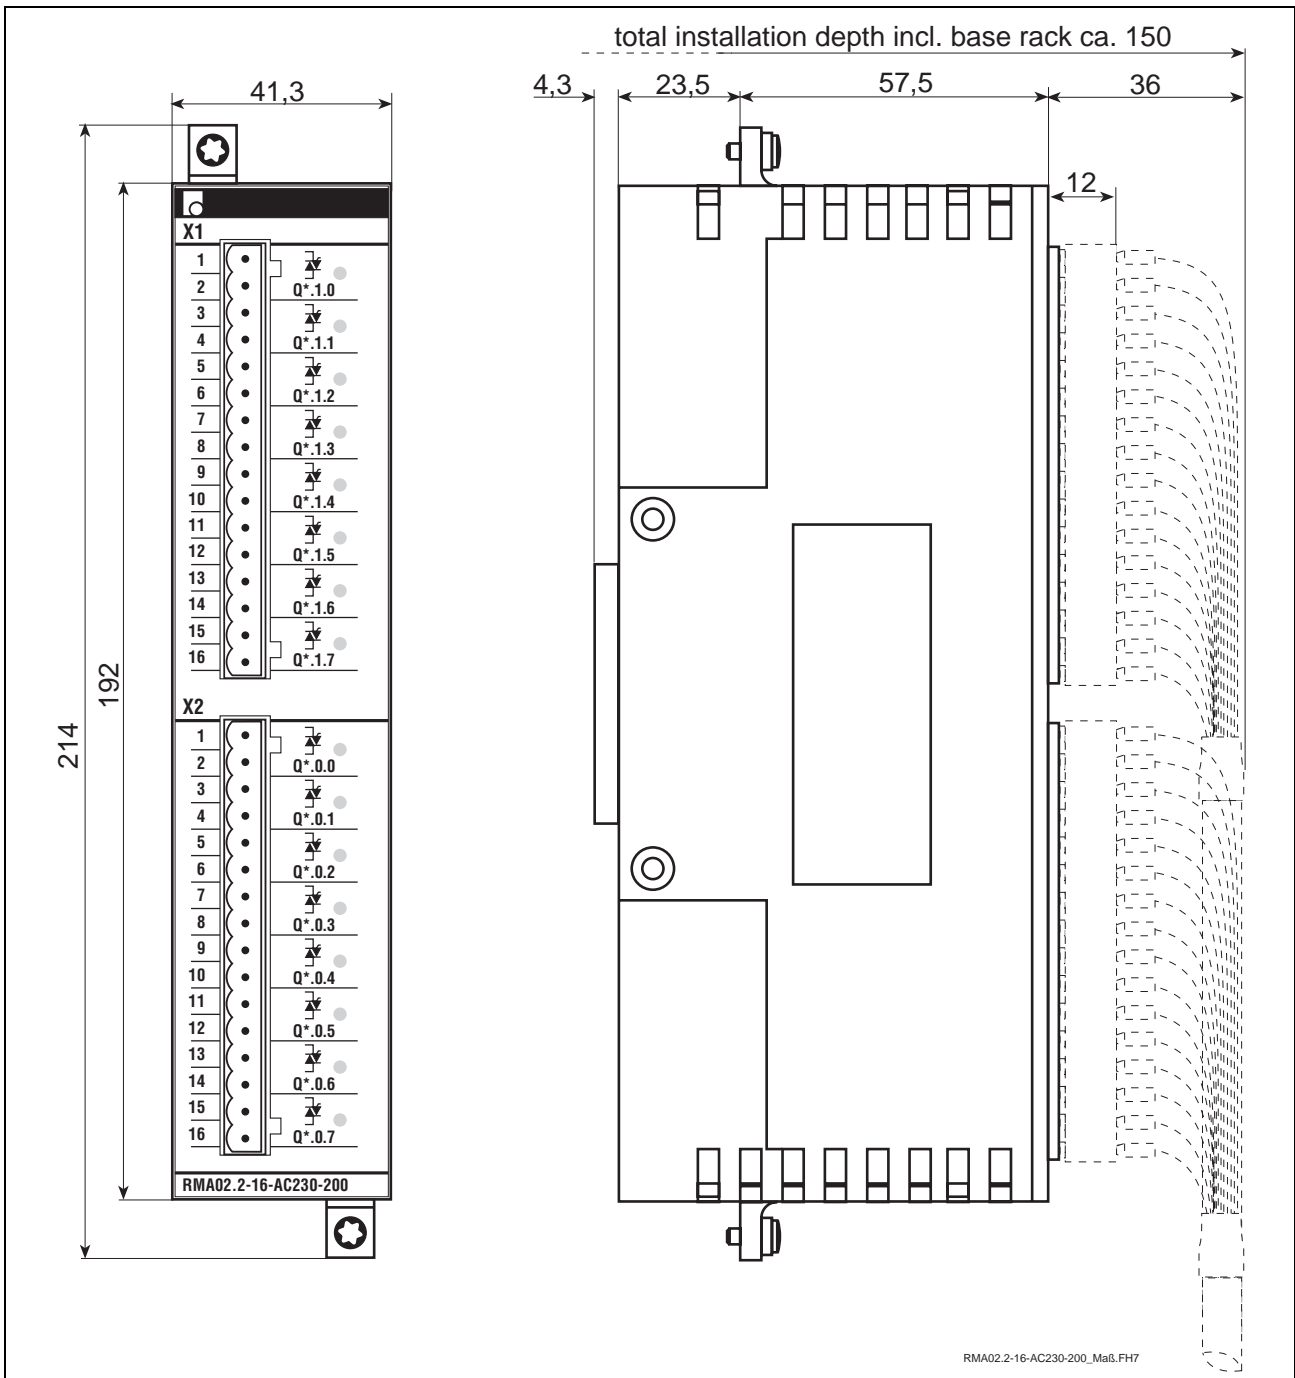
Mounting dimensions of RMA02.2-16-AC230-200
